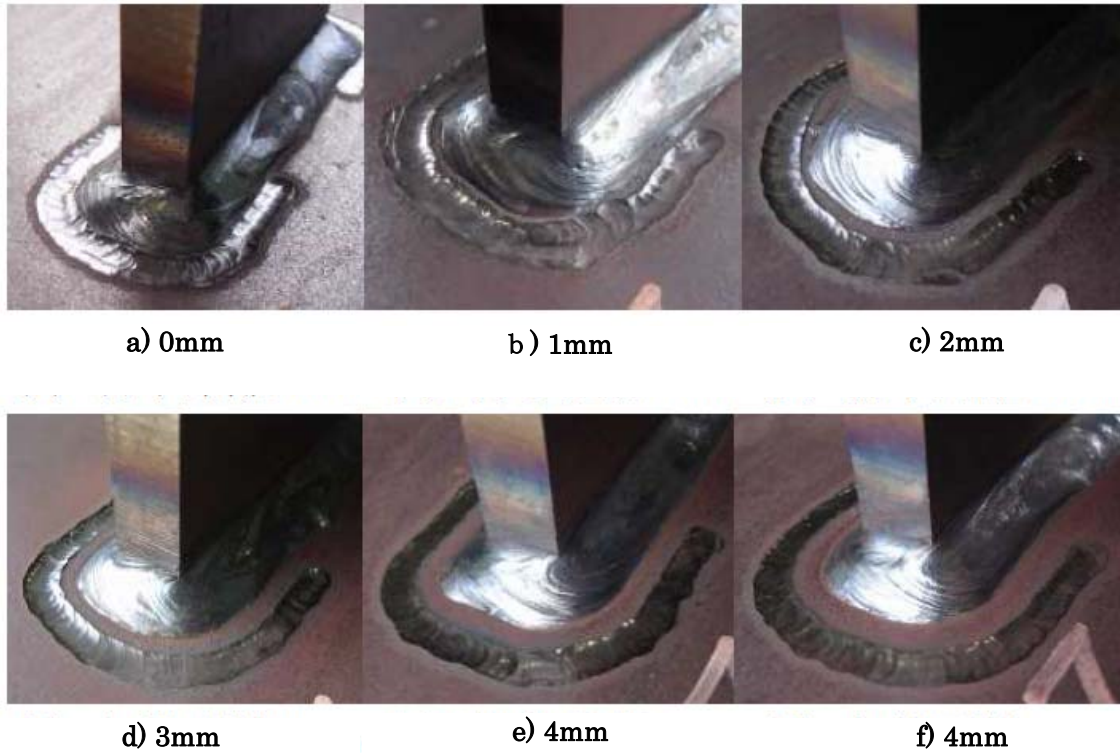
Appearance of weld toe after hammer peening on base metal
